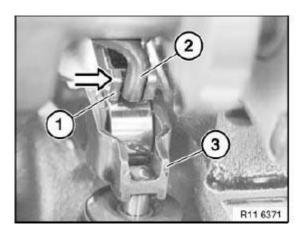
Inserting Torsion Spring In Intermediate Lever Courtesy of BMW OF NORTH AMERICA, INC.
